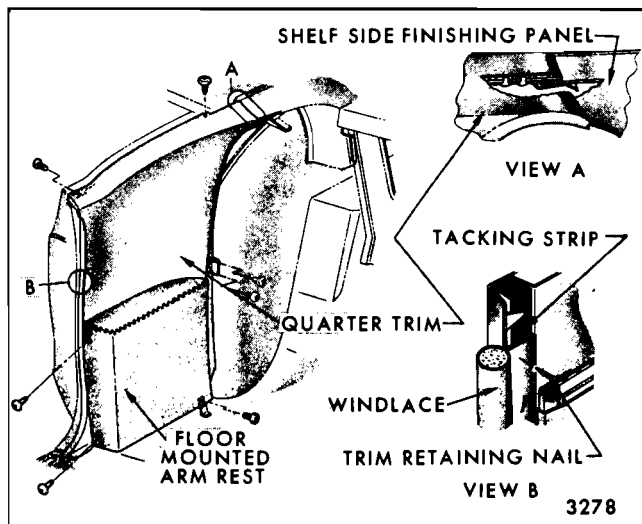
Rear Quarter Arm Rest and Trim Assembly - "49487" Style
